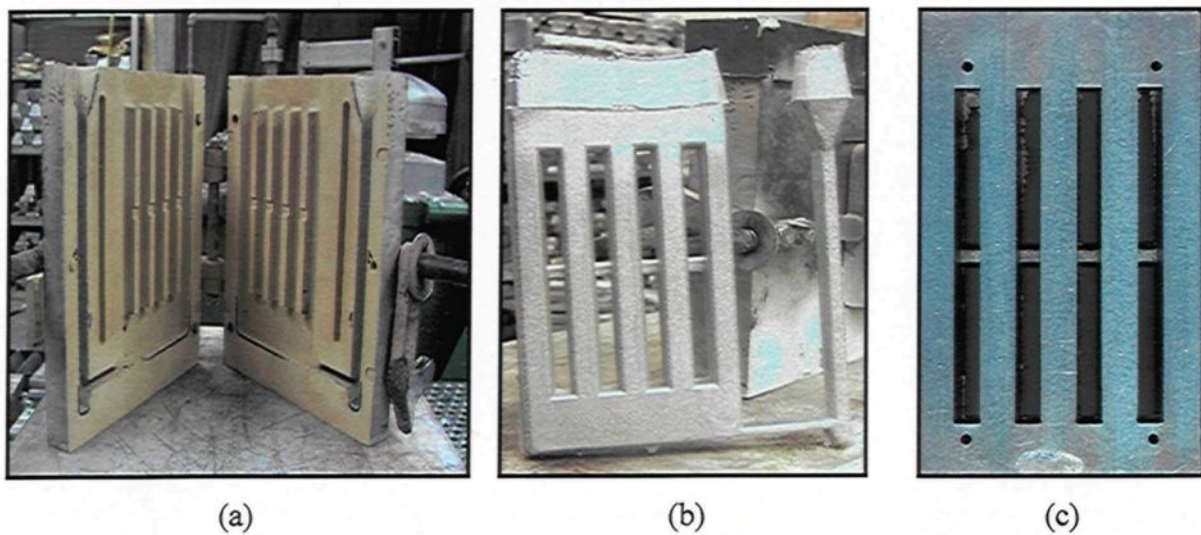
(a) Waffle-plate metallic mold; (b) machinability test block casting; and (c) machinability test block.
